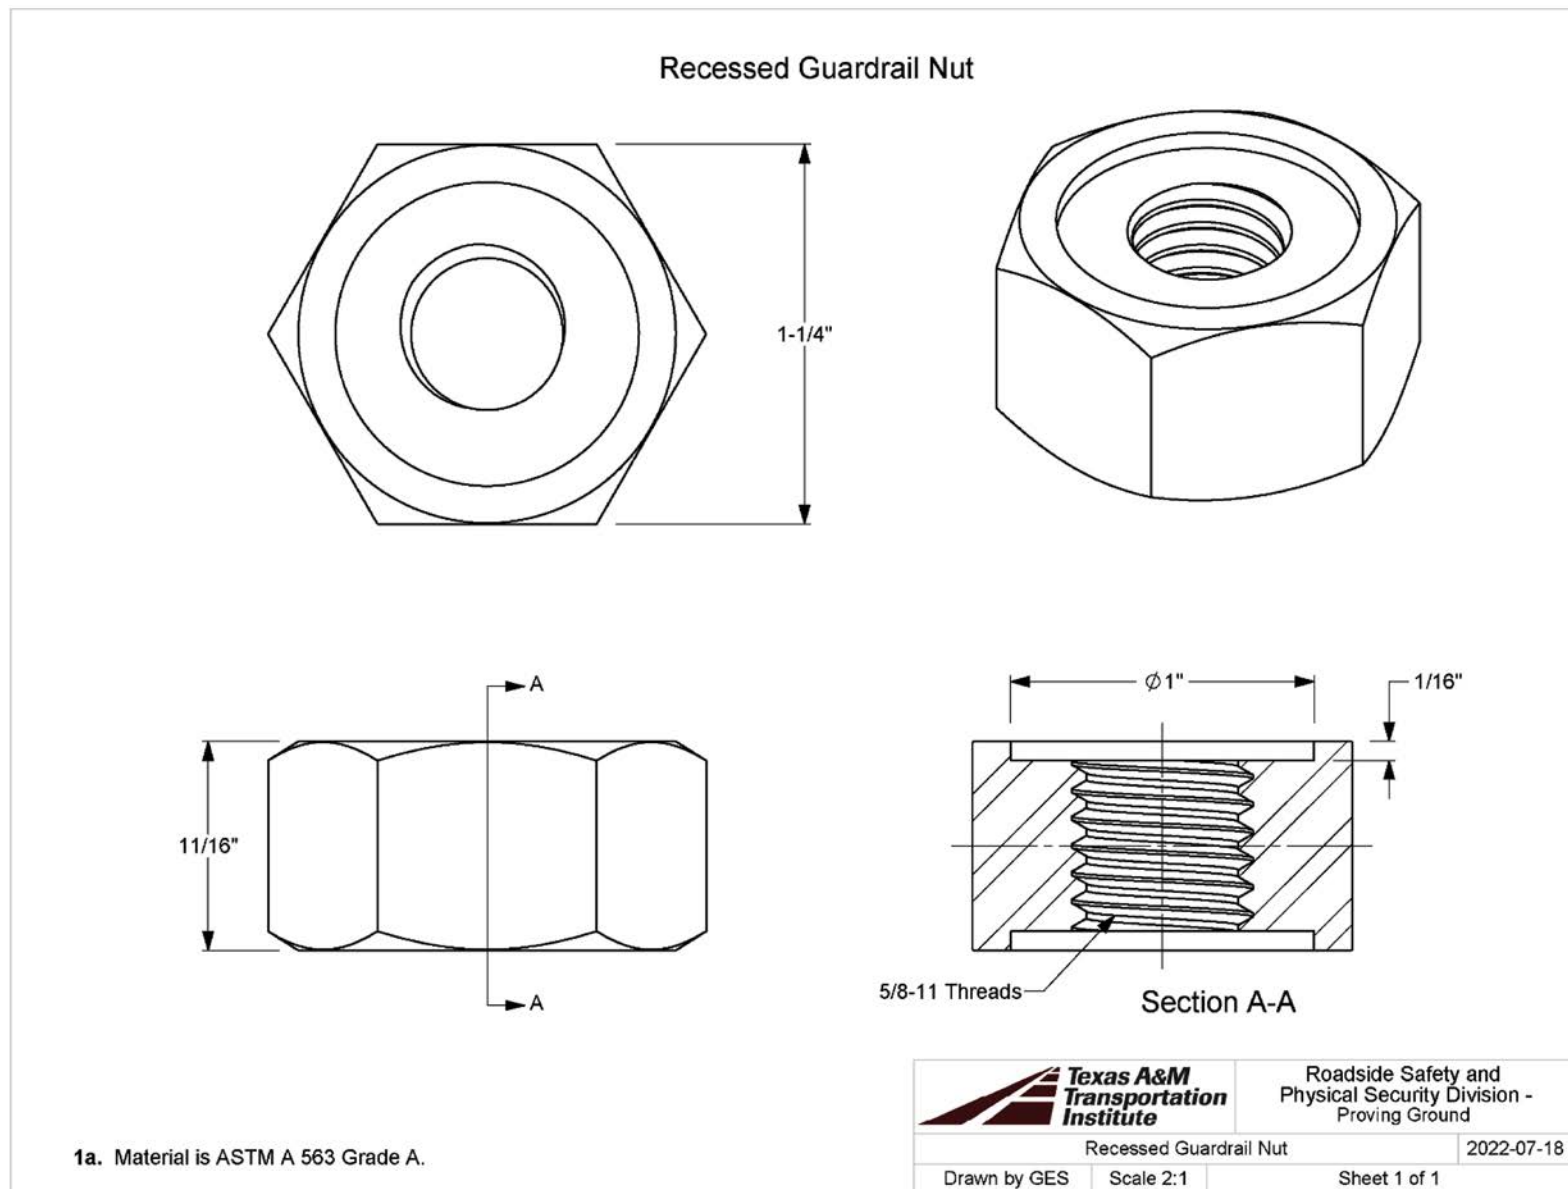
Tests 612941-02-3 and -4 guardrail nuts.
